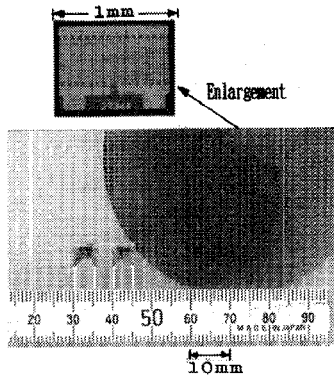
Elements after dicing and epoxy-resin-packaged components.
